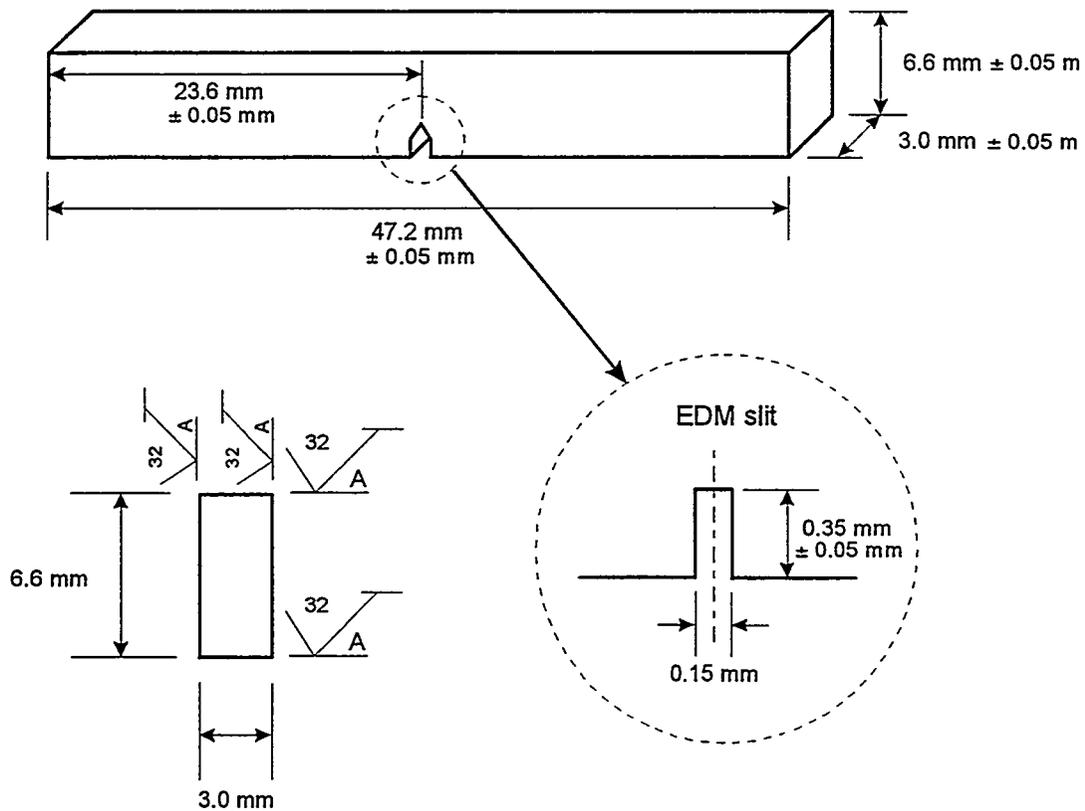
Geometry and size of bend bars for fracture toughness testing.
